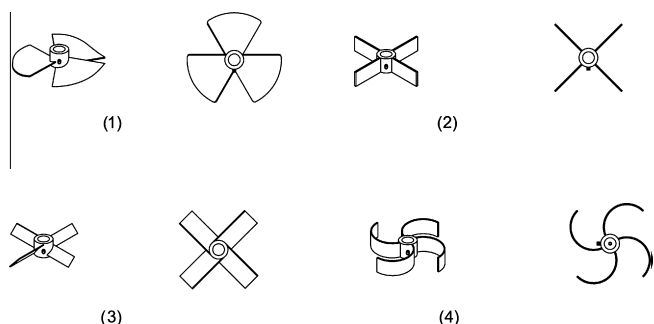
Impeller types used in the experiments. (1) Helical turbine; (2) Flat-blade turbine; (3) Inclined-blade turbine; (4) Curved-blade turbine.
